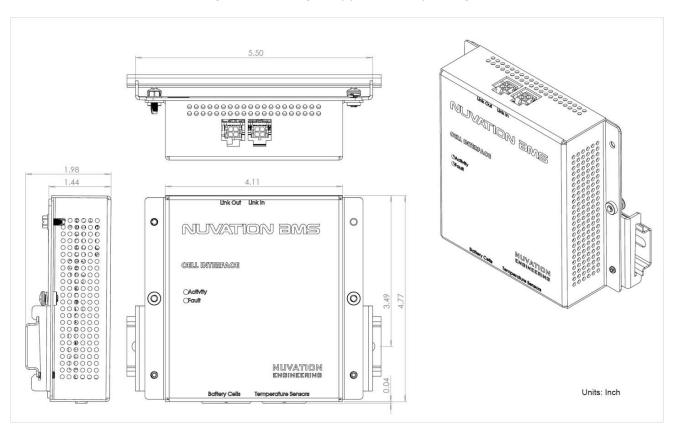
Mechanical Drawing of Cell Interface with Cell Interface Mounting Bracket (Bulkhead-to-DIN)
